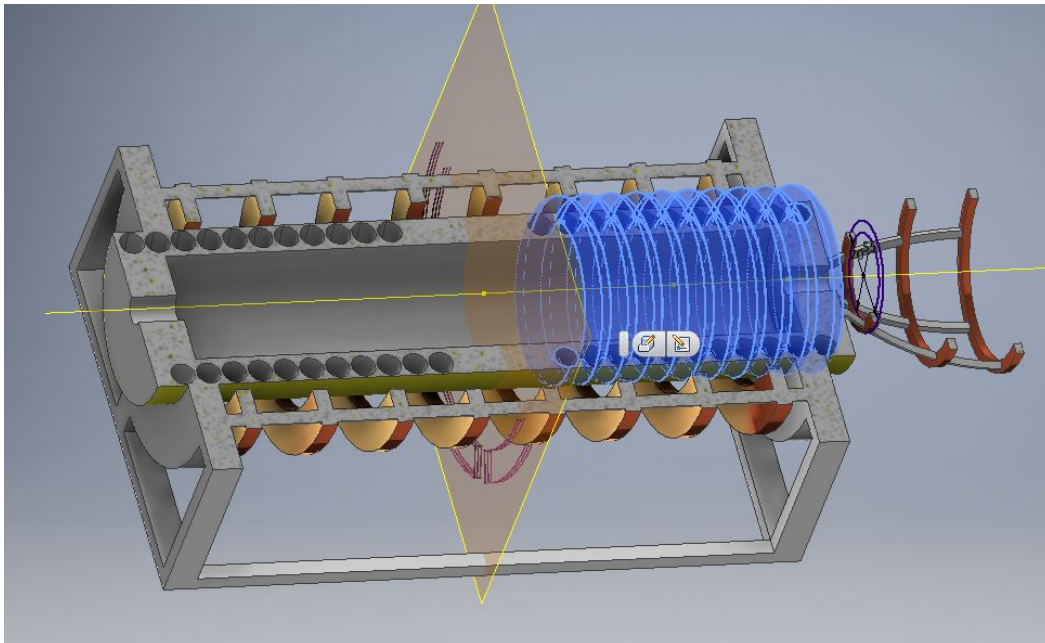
Cutaway view of the engine model showing cooling channels embedded in shielding.
